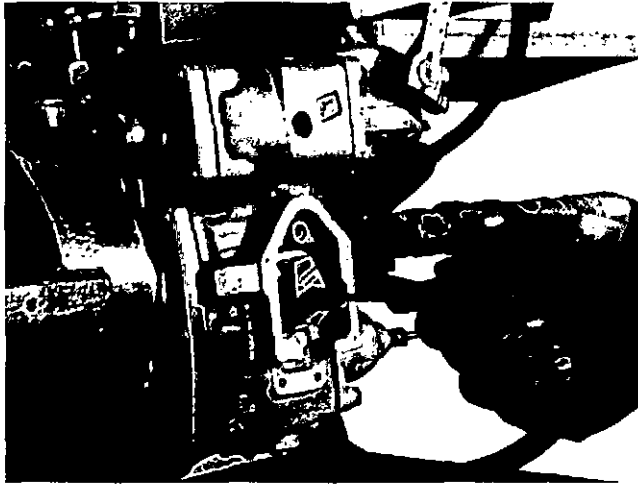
, (F5343). Adjust the fuel adjustment screw inside the throttle shaft.
